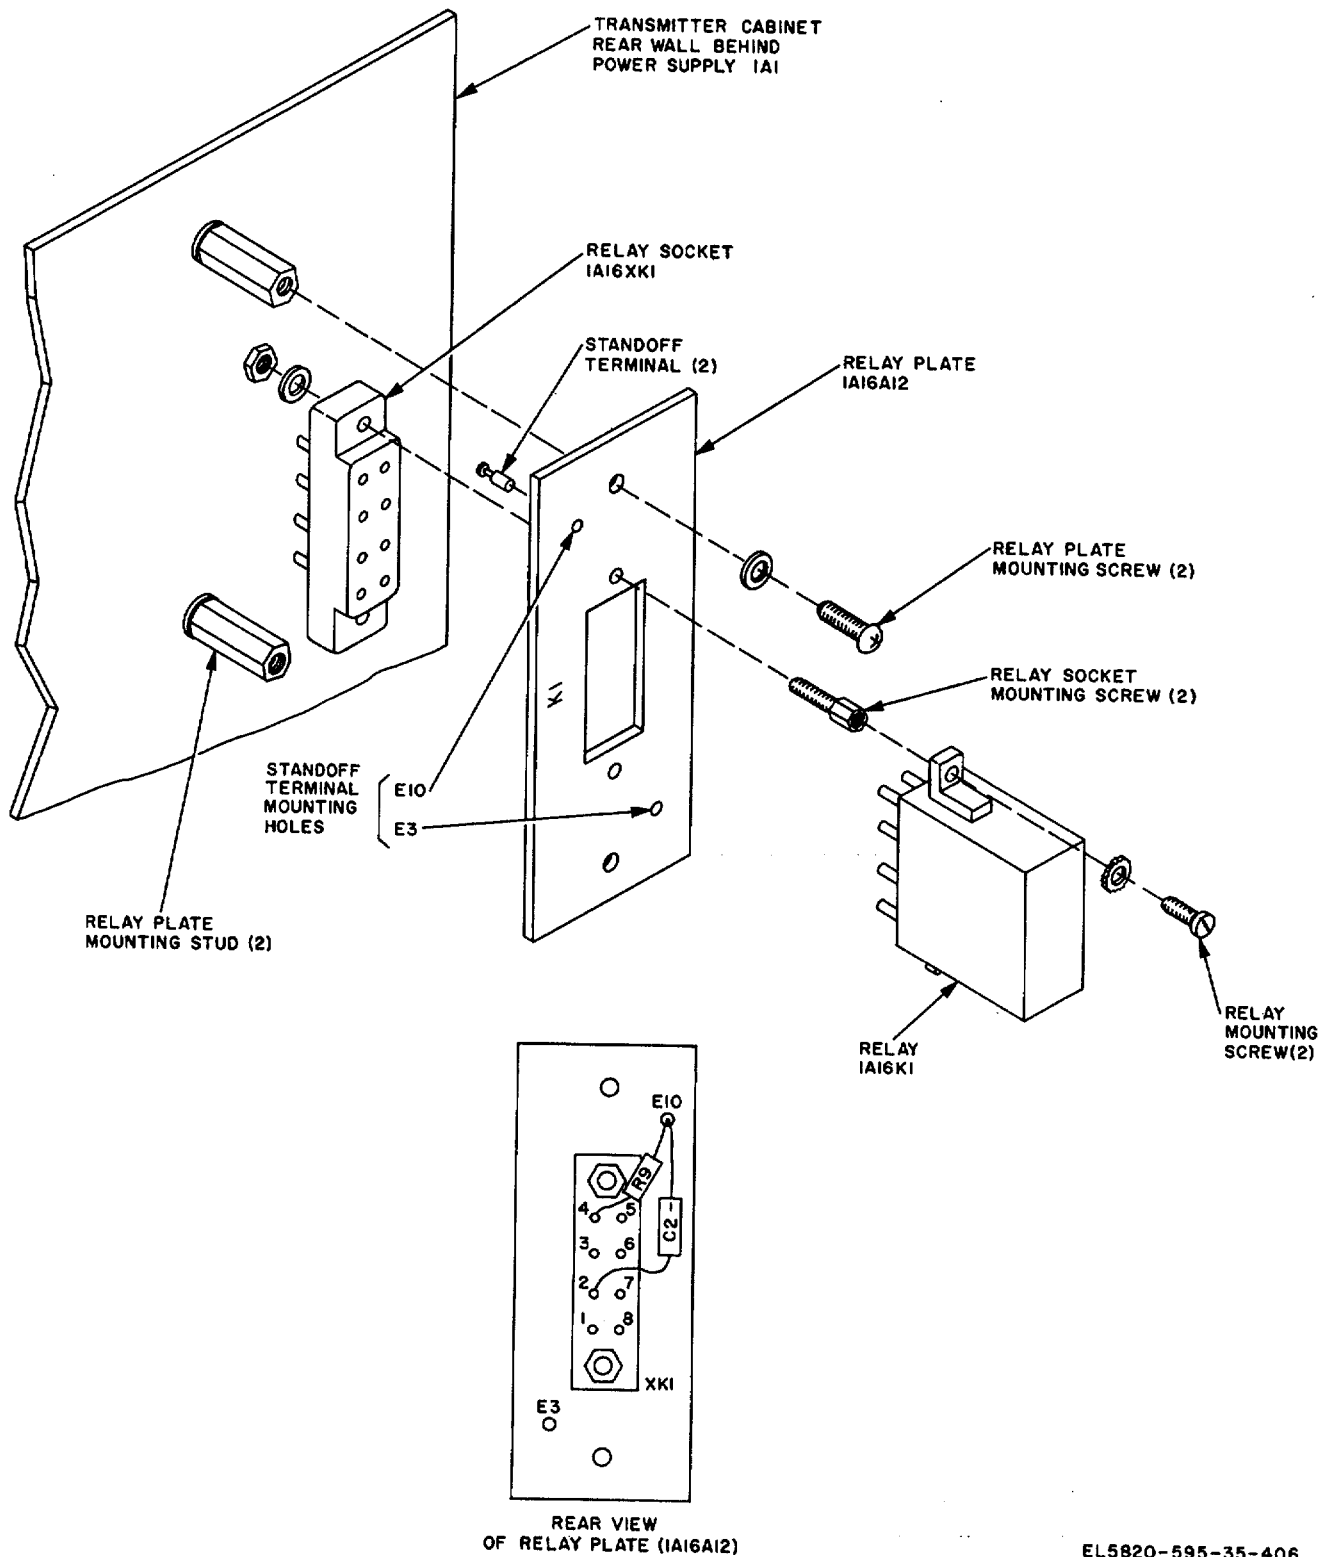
Disassembly of parts on transmitter relay plate 1A16A12.
